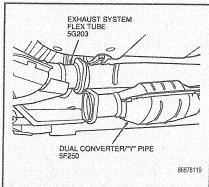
Remove the exhaust pipe-to-catalytic converter attachment
